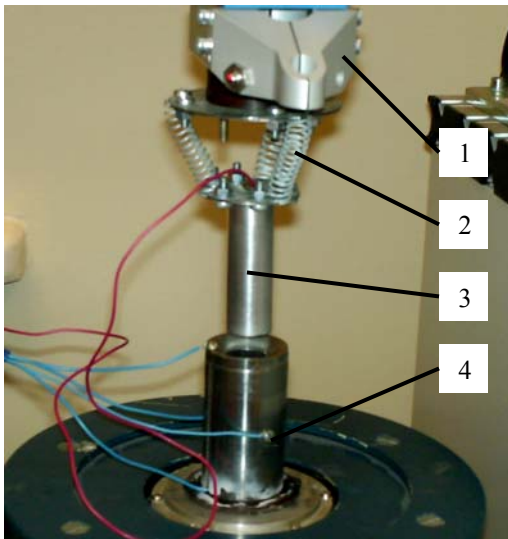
Parts in assembly position before insertion process: 1 – robot gripper; 2 – remote center compliance device; 3 – peg; 4 – bush
